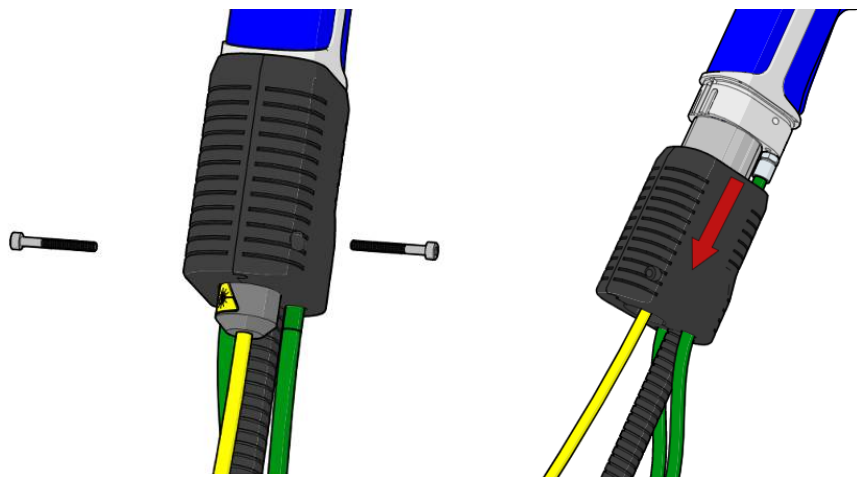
Removing Boot from weld head to expose fiber connector
